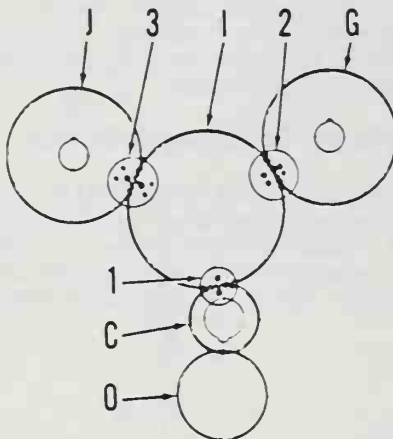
Diagram of drive gears showing proper alignment of timing marks. Note three marks (3) on injection pump gear (J) and idler gear (I); two marks (2) on camshaft gear (G) and idler gear (I); single marks on crankshaft gear (C) and idler gear (I). No marks are used on oil pump gear (O).
